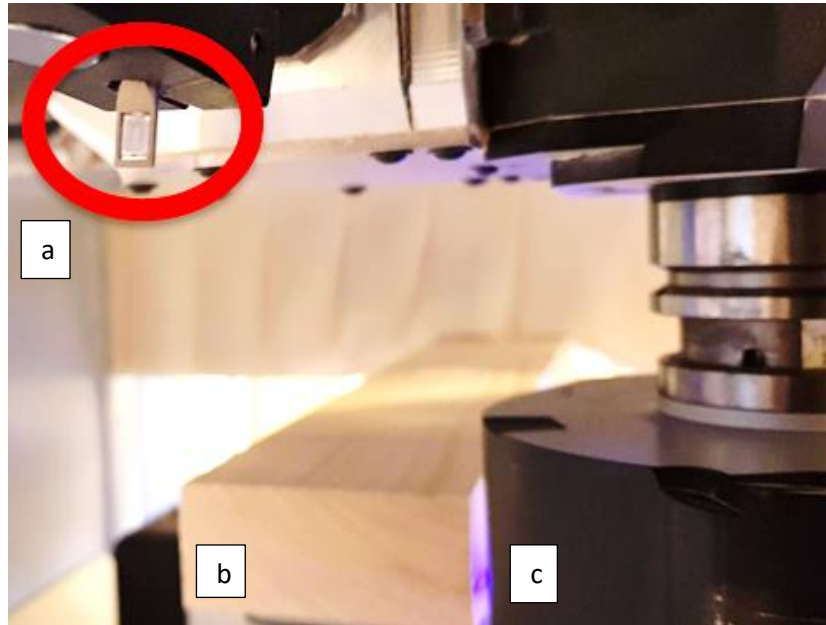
Experimental setup; sensor (a), workpiece (b), tool (c)
